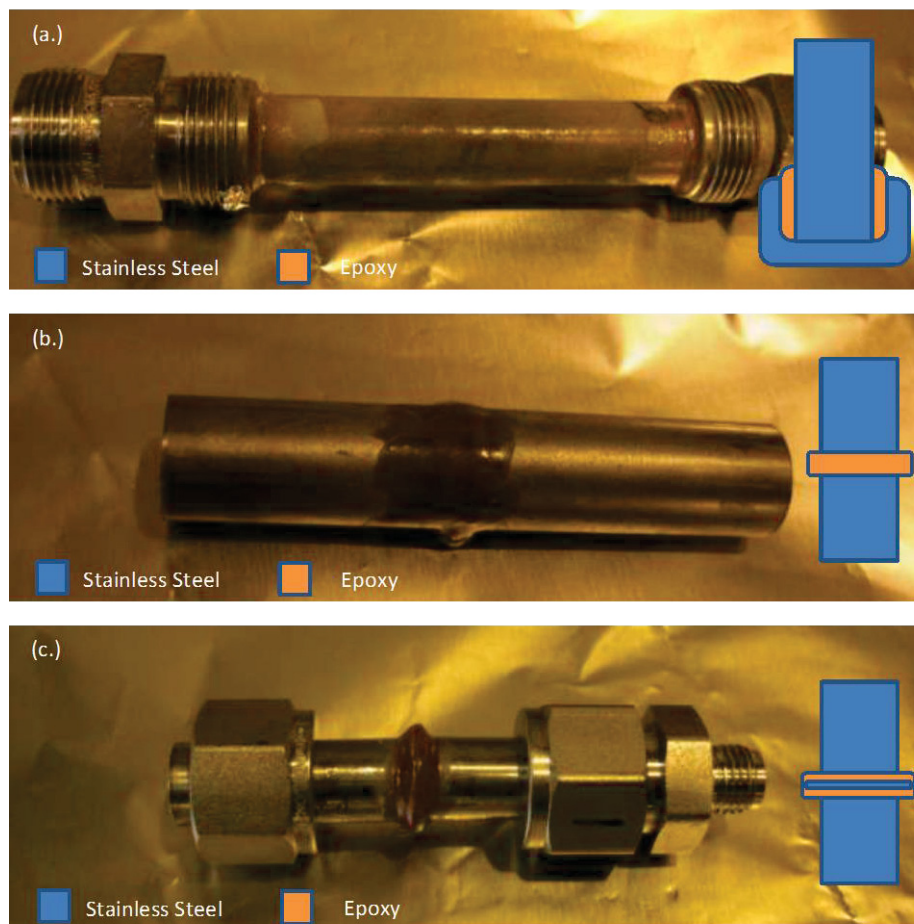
(a) Standard tube in fitting geometry, (b) butt joint, and (c) modified butt joint that mimics seal to flat disk.
